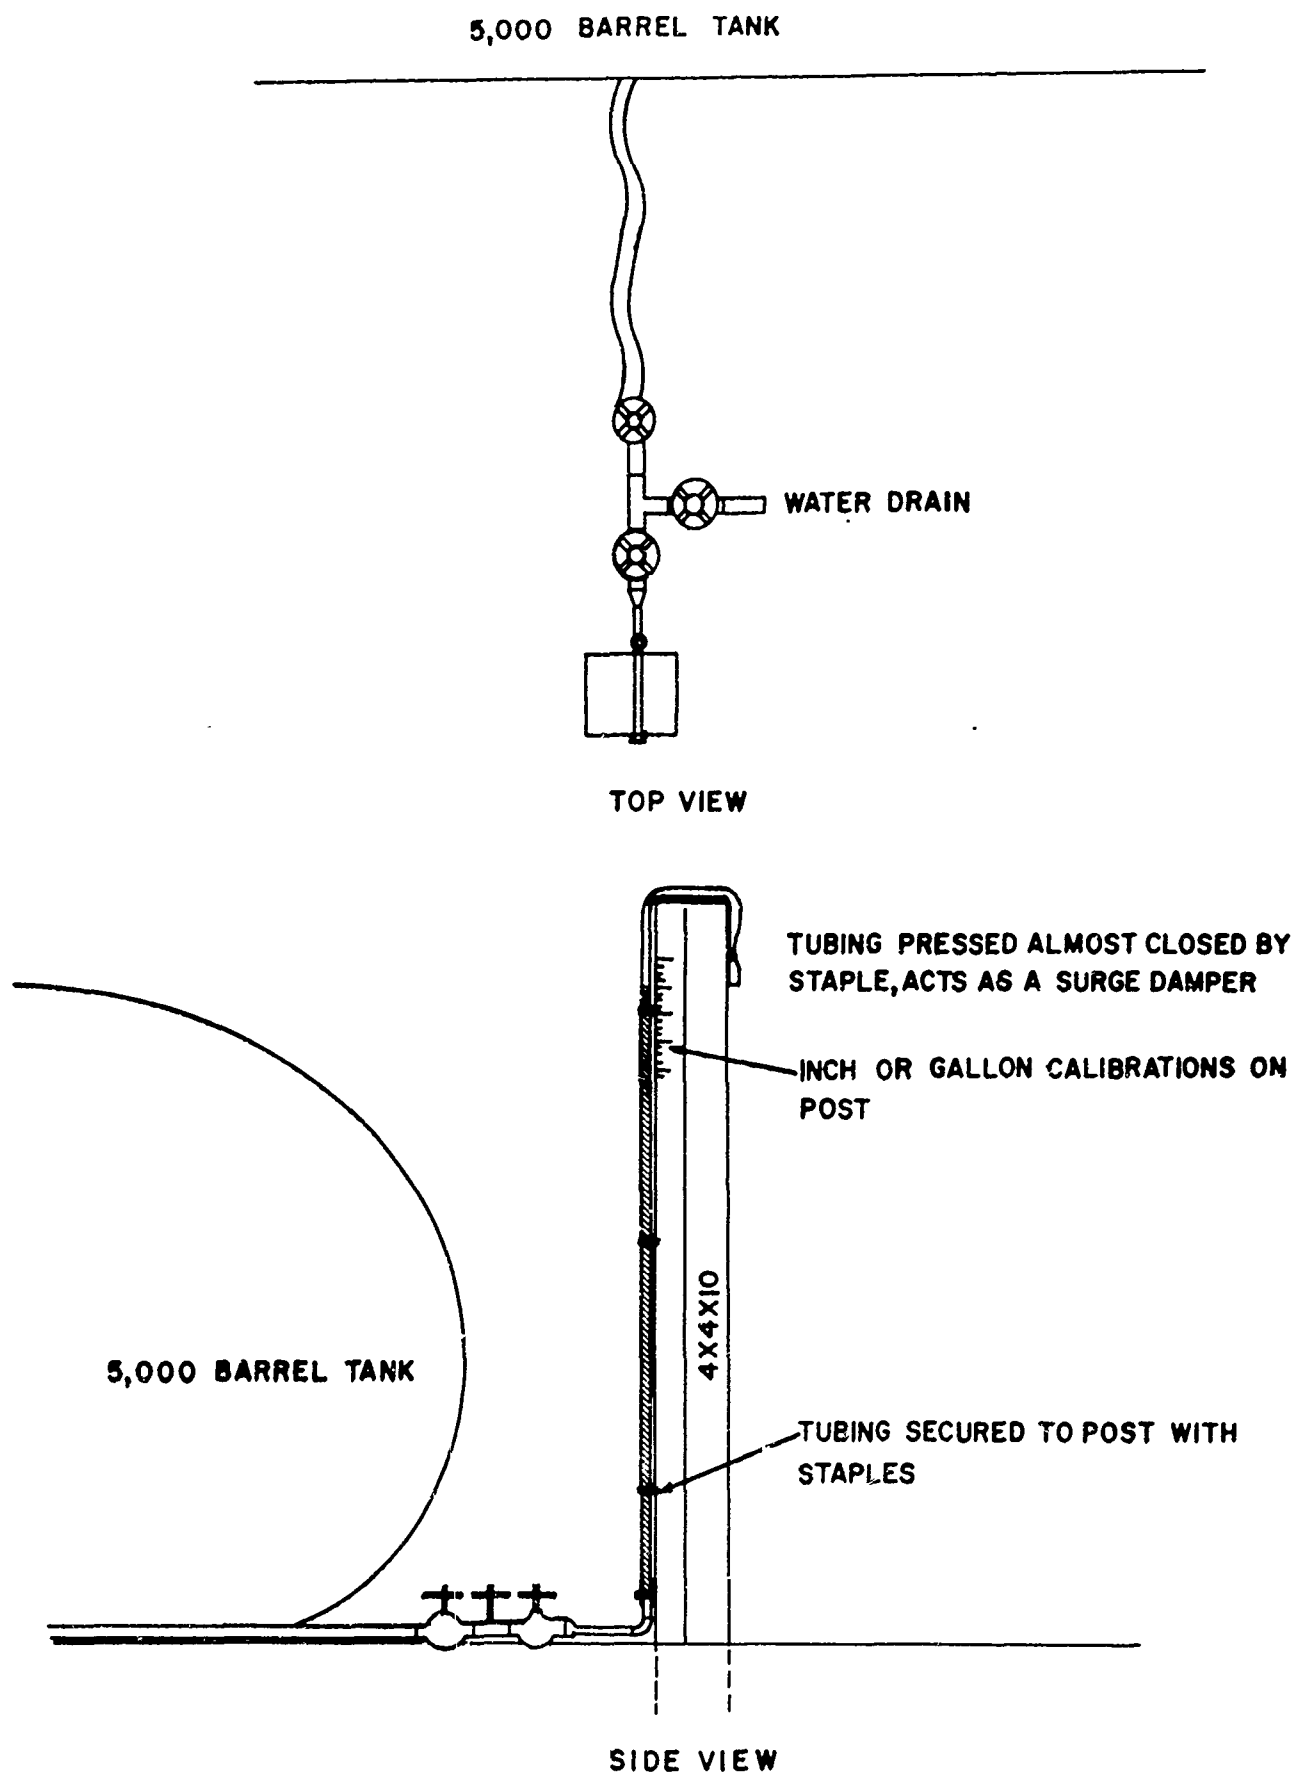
ASSEMBLED COMPONENTS OF COLUMN GAGING ASSEMBLY
